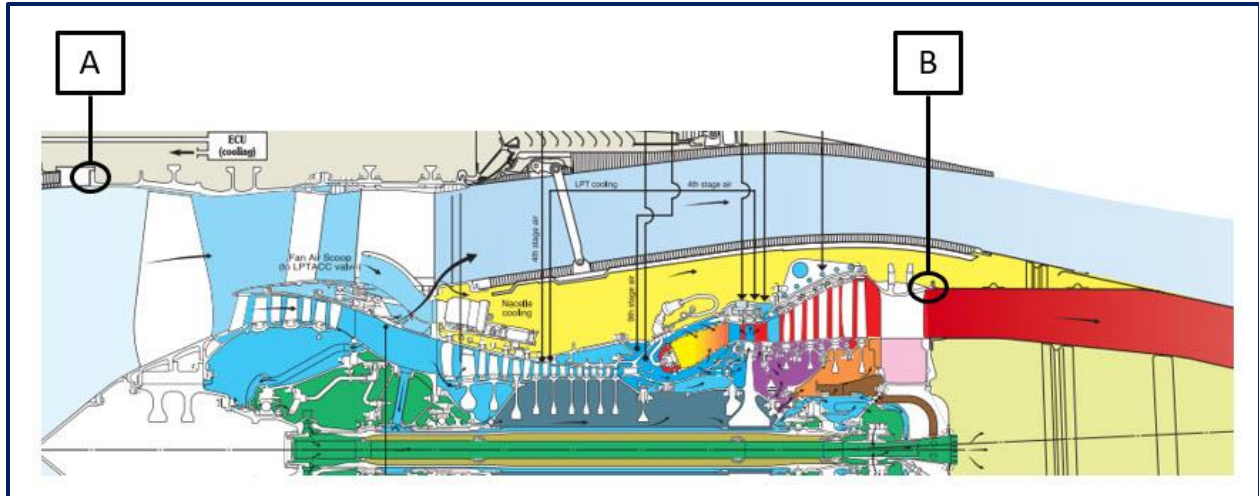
CFM56-7B24 Cross-Section with “Flange-to-Flange” Measurement Location
